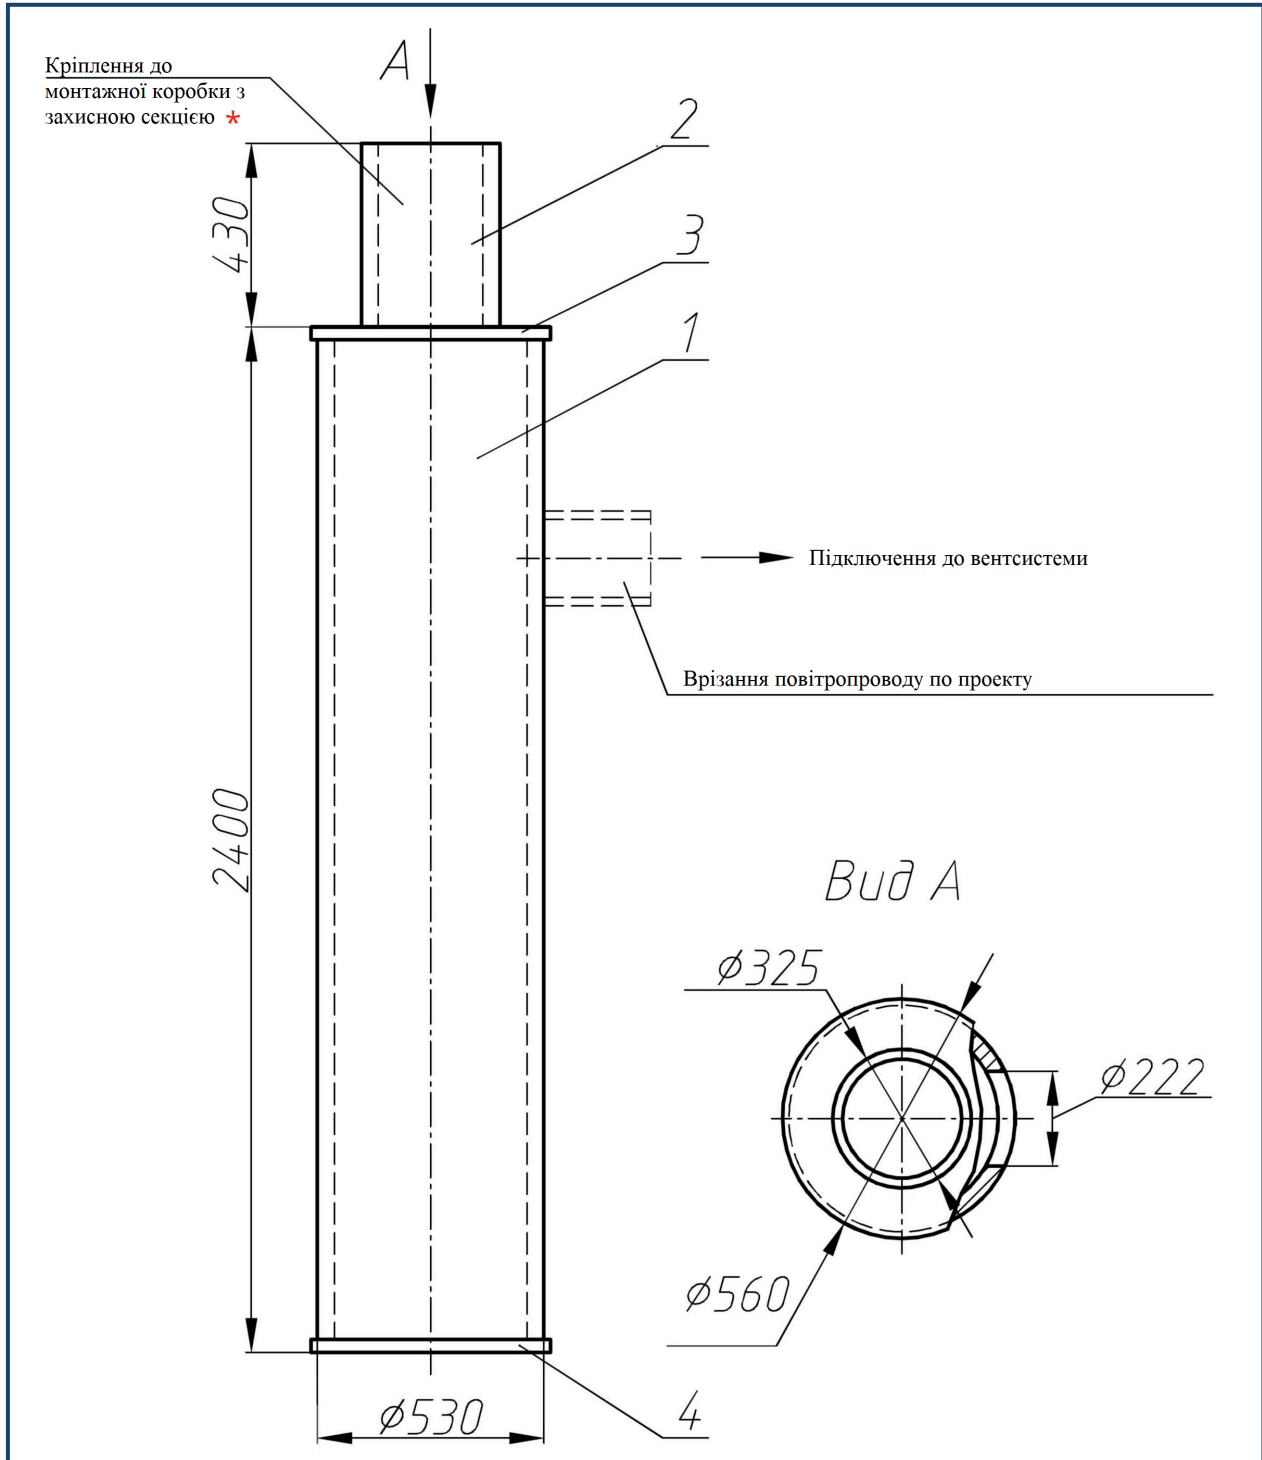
Overall and connecting dimensions of the expansion joint BRK-0.5
